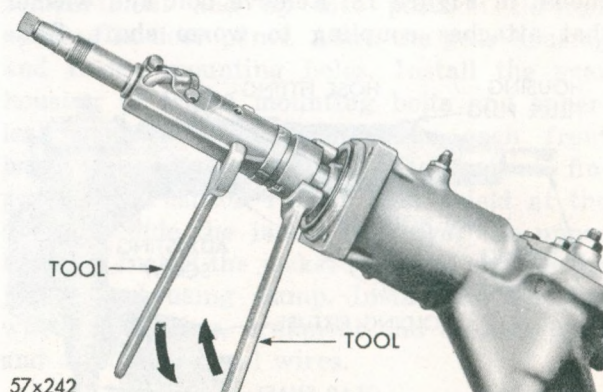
Worm Connector Nut Removing or Installing Tools C-3321 and C-3326
